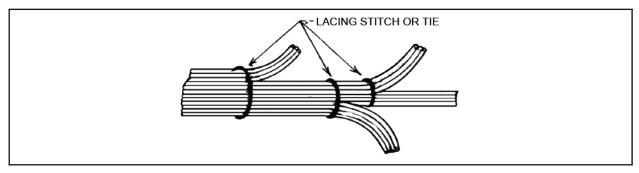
Spot ties at breakouts should be located as shown.
